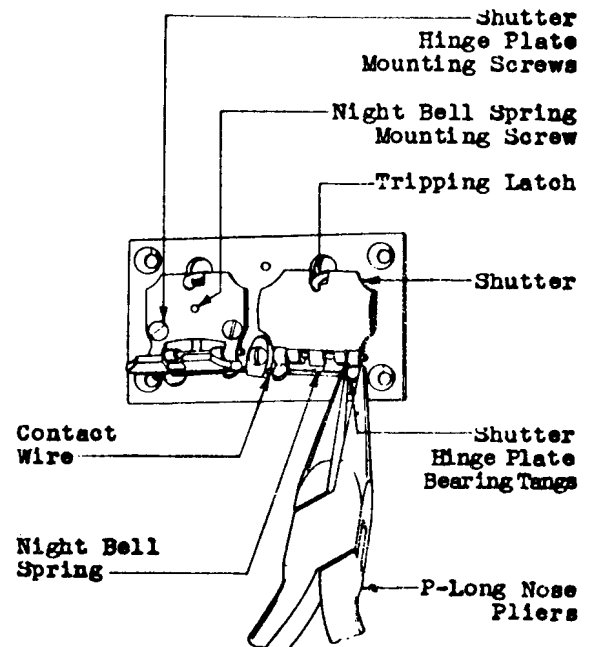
Method of Adjusting the Shutter Hinge Plate Bearing Tangs
